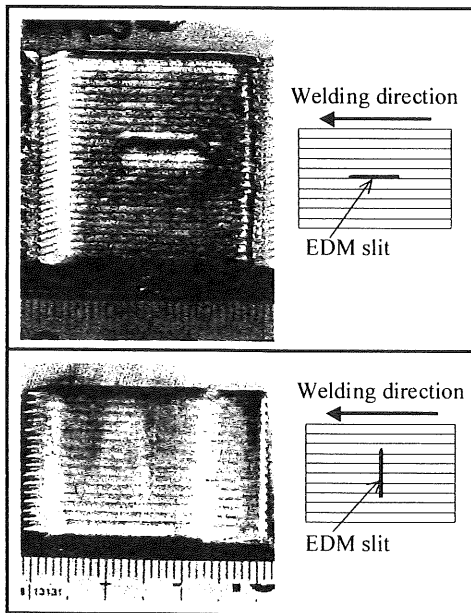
Appearance of under water seal weld with multifunction laser welding head
